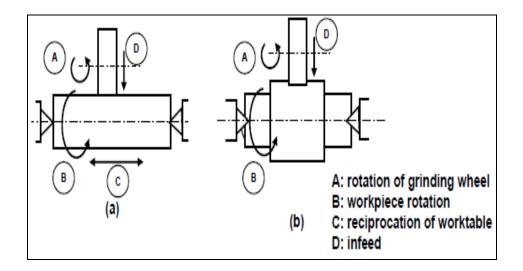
Cylindrical (a) Traverse grinding (b) Plunge grinding
